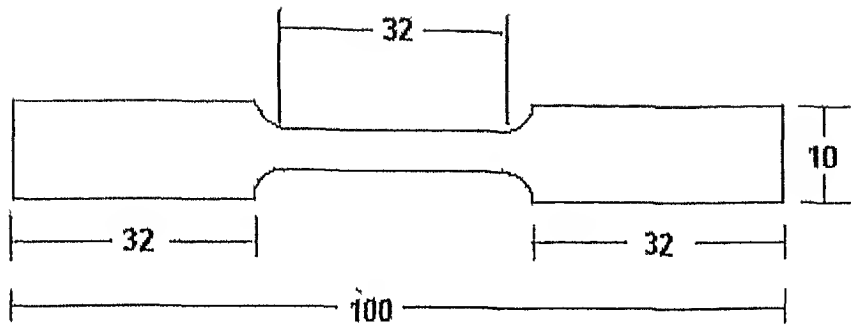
2 Standard ASIM tensile specimen (all dimensions in mm)
